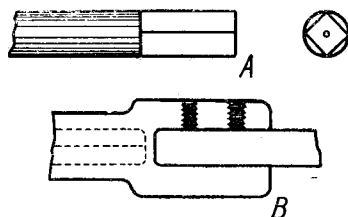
Sliding dog arrangement for driving shaft. ("A") shows squared section of the shaft terminal driving spigot. ("B") shows sleeve secured by set-screws to motor shaft, with open end profiled to a square section internally
